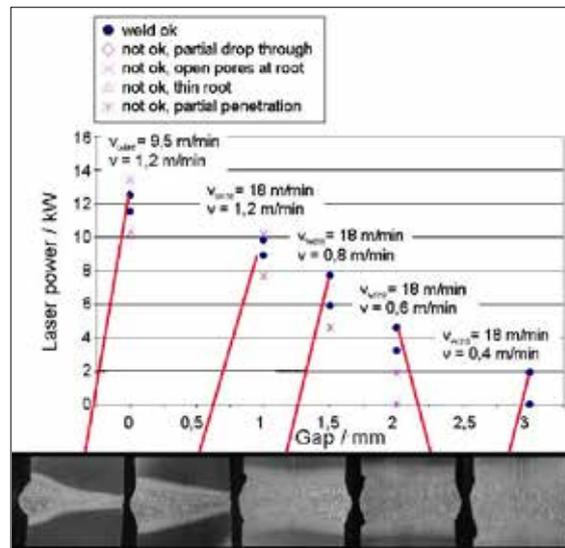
The process windows and gap bridging capability for laser-MAG hybrid welding of 15 mm structural steel in flat welding position (6°V, PA) with leading MAG at a constant welding speed of 1.2 m/min
